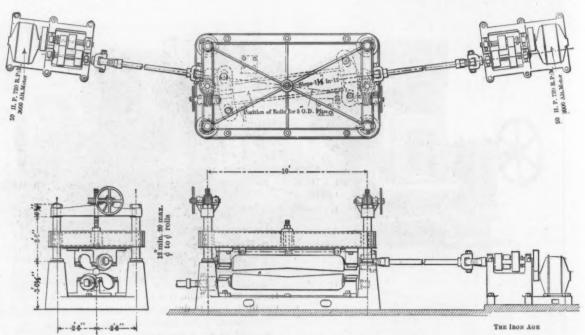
Plan and Elevation of Cross Rolls, Horizontal Type.
